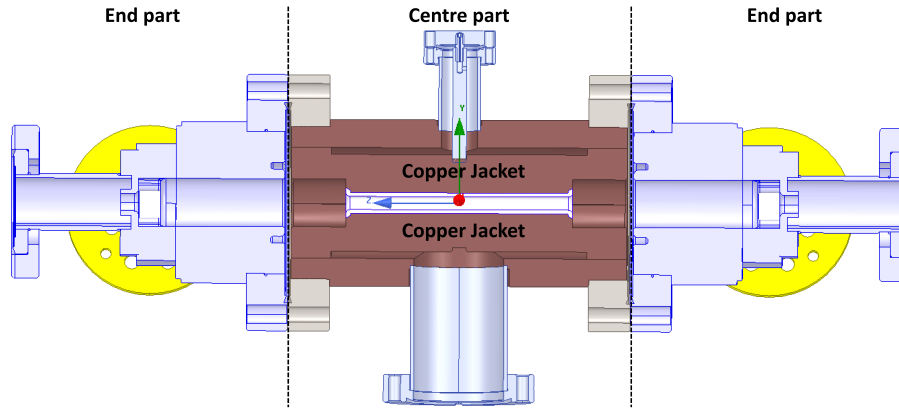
Full-assembly mechanical design for the whole structure, including a center part and two end parts.
